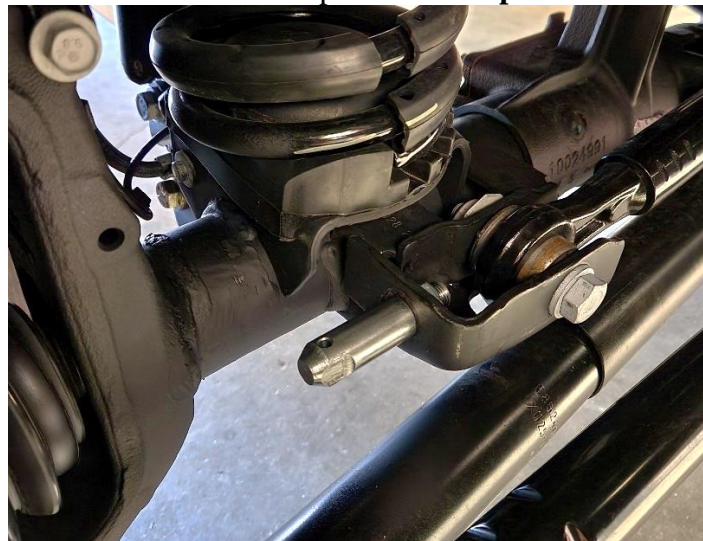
Disconnect Stud Installed on Factory Track Bar Mount
